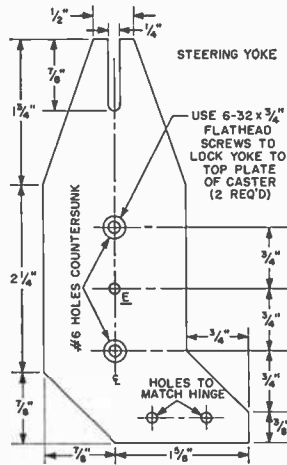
Carefully cut steering yoke to exact size (below, left). Secure the finished piece to the caster assembly top (below).
